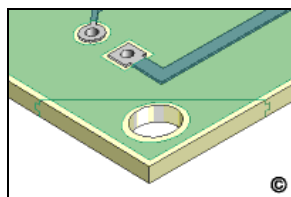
Complete by drilling holes or adding circuitry and coatings as needed.
